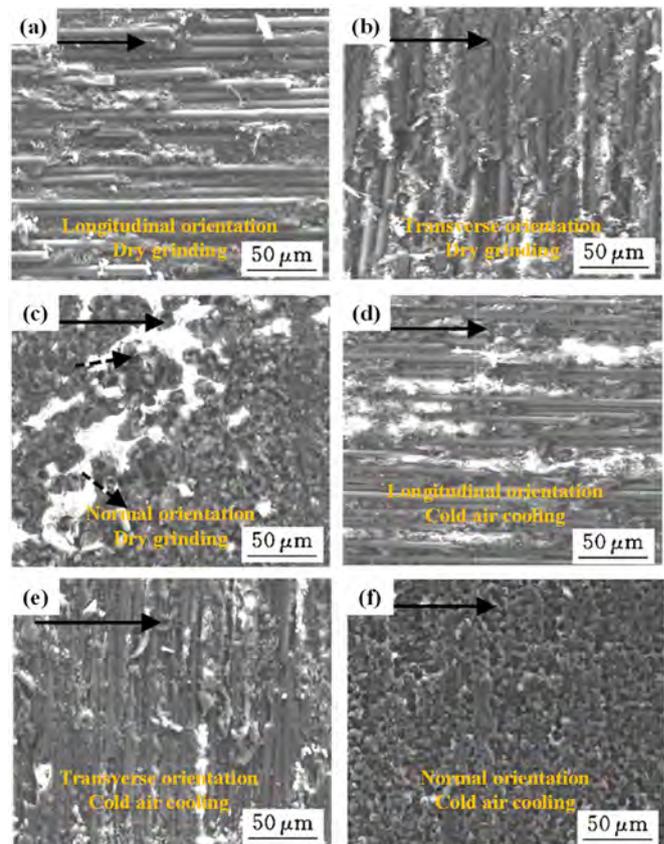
Grinding surface morphologies of the CFRP workpieces under dry grinding and cold air-cooling conditions [197].
